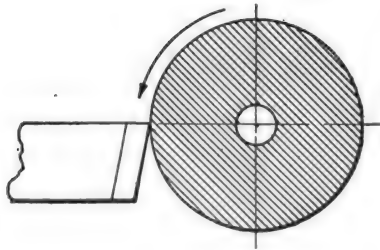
The direction of the work in relation to the lathe tool. proper cutting edge. The cutting edge of the tool is brought into contact with the metal as illustrated in Fig. 72. The direction of the work is noted by the arrow. When the tool is forced against the work in the lathe, the cutting edge of
